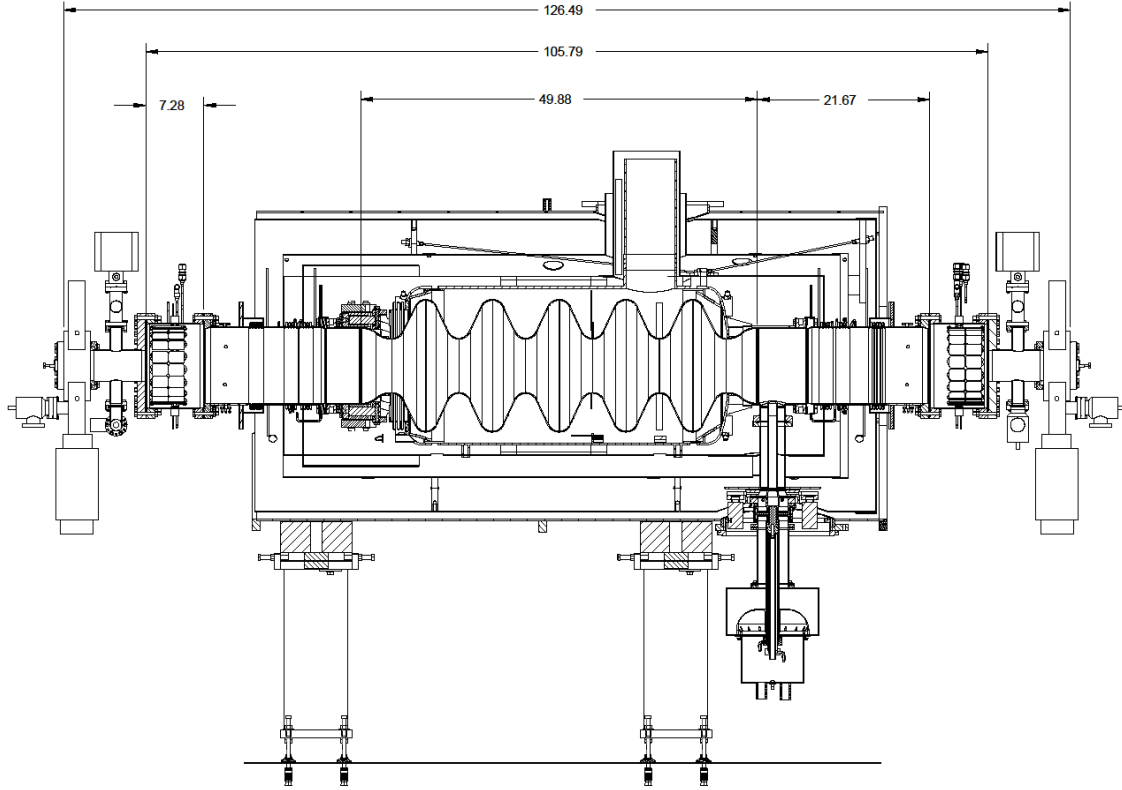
The cross-section of the R&D ERL 5-cell cavity vacuum string assembly (dimensions are given in inches)
